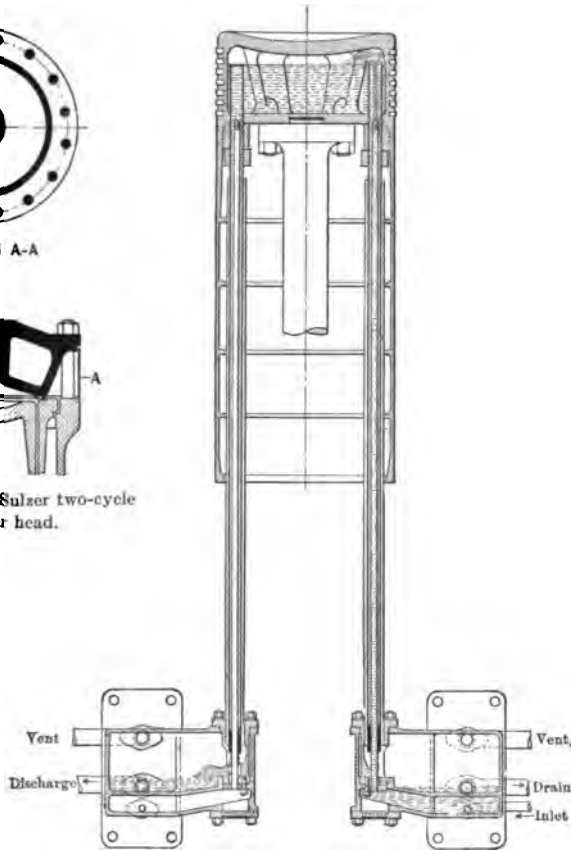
Busch-Sulzer piston cooling arrangement.
